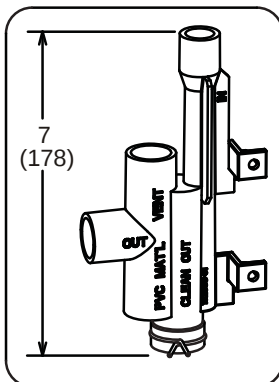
Trap / Drain Assembly using 1/2" PVC or 3/4" PVC, Cold End Header Box with 1/2" Drain Connection
